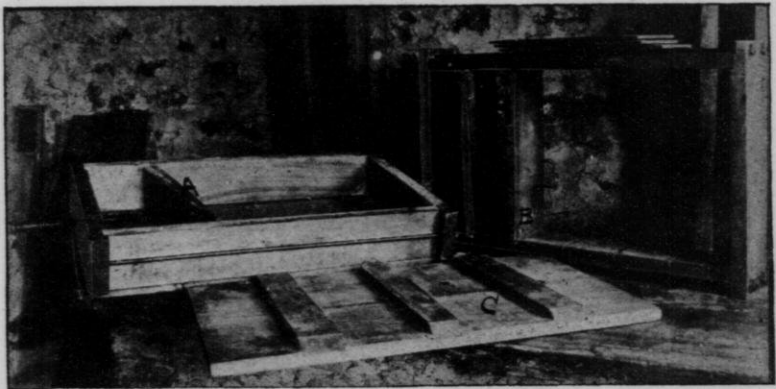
Block Swiss moulds. A, the adjustable end, moved by a screw. B, the partition which fits into the grooves making the right sized moulds after the blocks are cut. C, the cover or follower.
